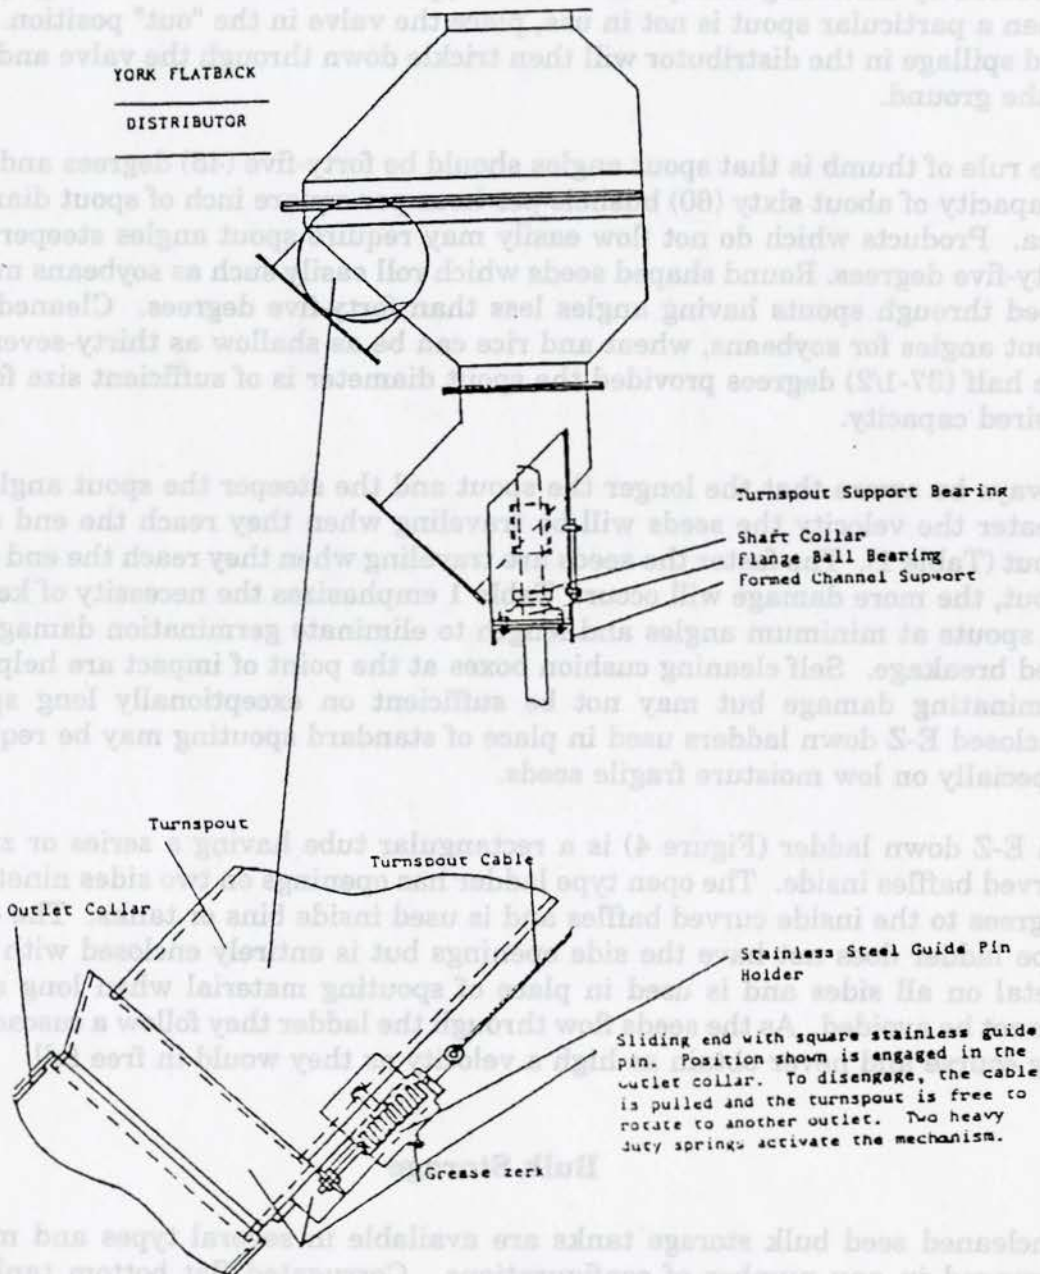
Hoppered bottom distributor with interlocking turnspouts.
